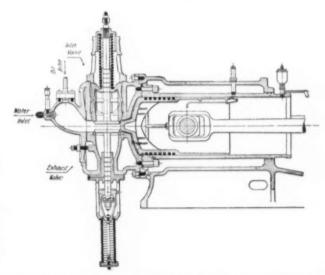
SECTION OF RUSTON PROCTOR OIL ENGINE CYLINDER
